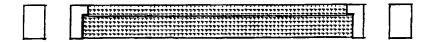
Enlarged cross section of the improved plate frame showing how the polymer filled metal foam fits into the plate. The patterned section is the polymer filled metal foam, with the lower piece being the piece with the gas barrier inside of it. The gas barrier is located near the center of the plate.
